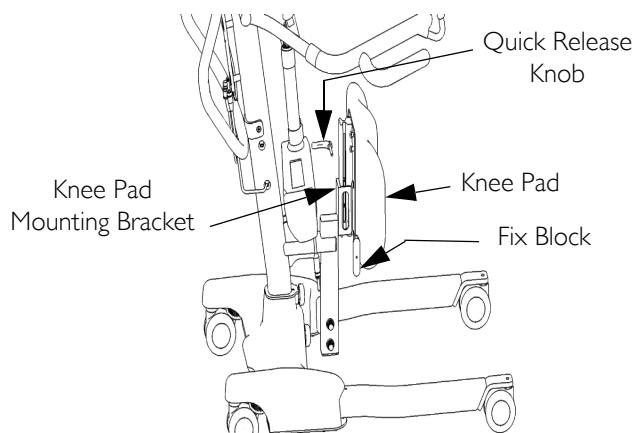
Assembling the Knee Pad to the Mast Assembly
